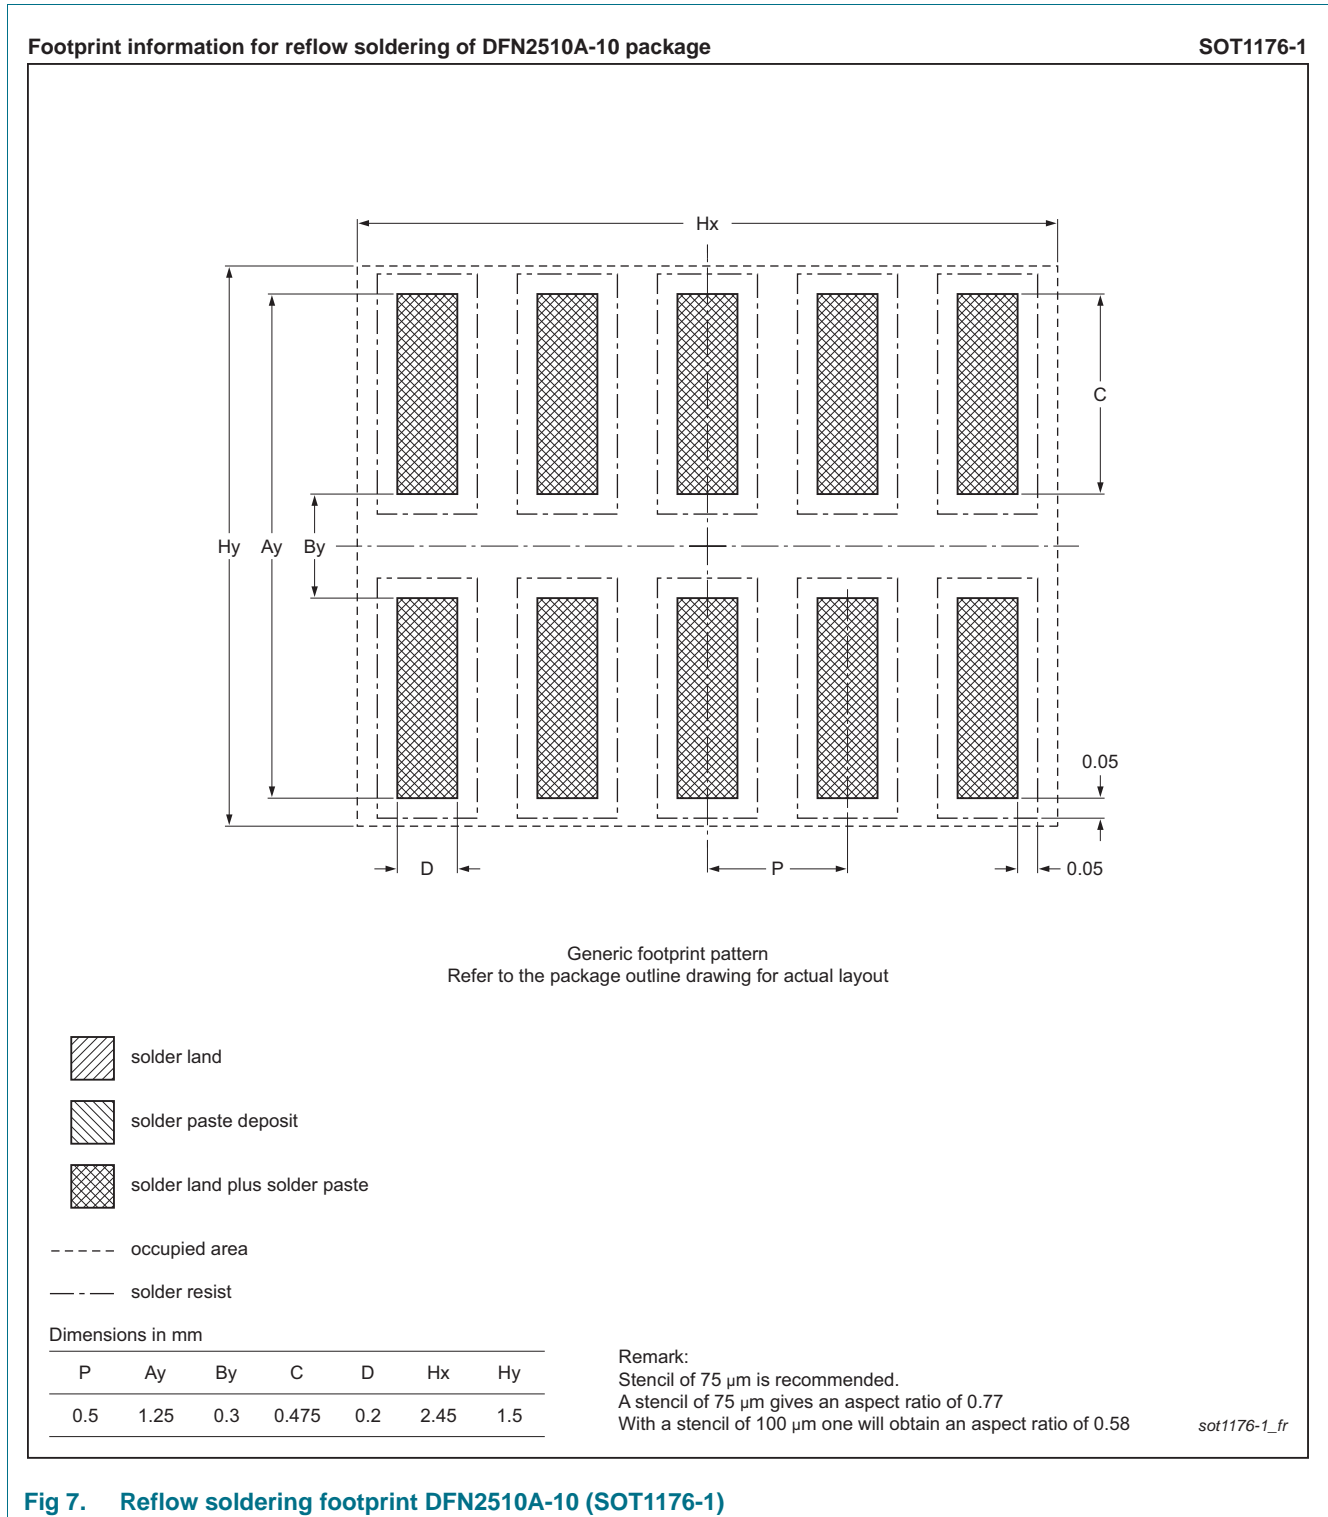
Reflow soldering footprint DFN2510A-10 (SOT1176-1)
